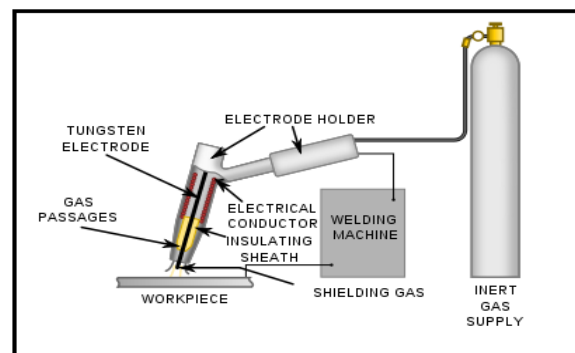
Schematic Diagram of TIG Welding System
